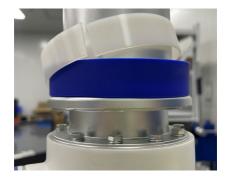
Remove the upper arm rubber ring and the supporting ring
